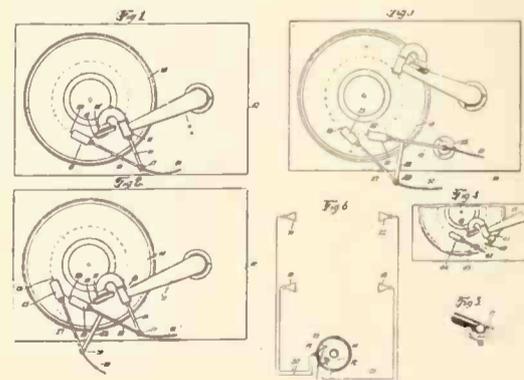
is a detail perspective view of universal joint which may be employed in connection with the mounting of the electrical reproducers. Fig. 6 is a diagrammatic view illustrating the manner in which sound may be distributed by means of the improved arrangement of reproducers.
